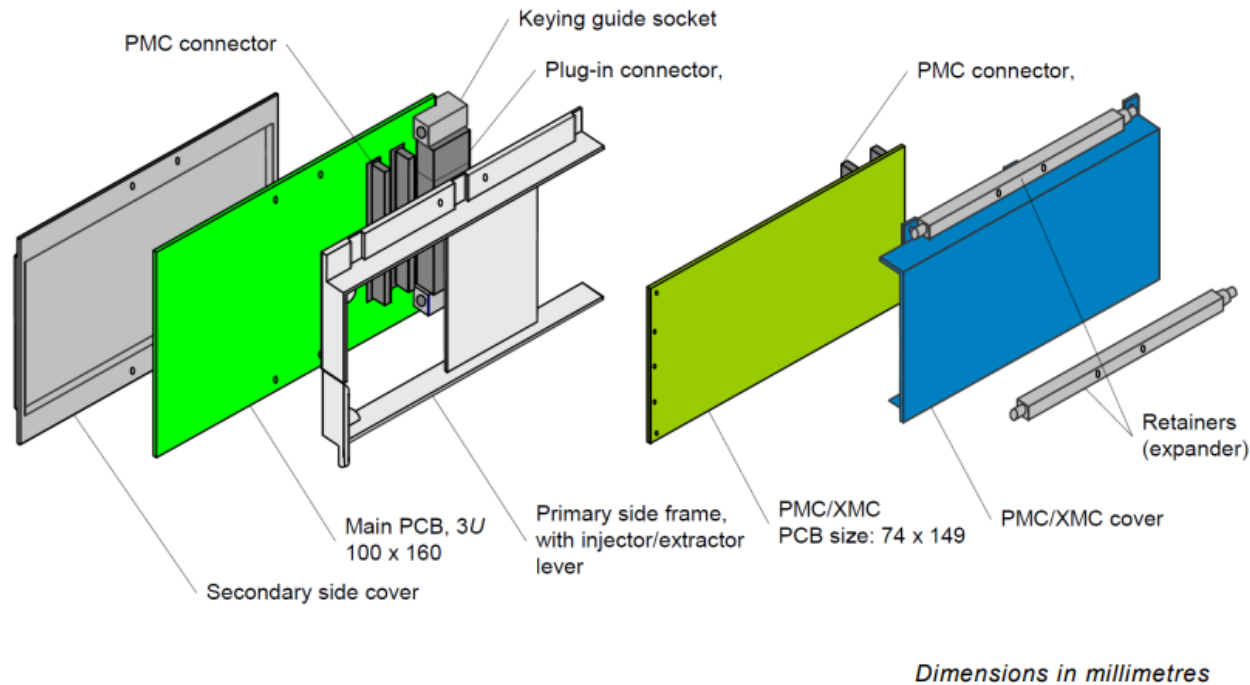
Assembly of VPX-REDI 3U conduction cooled plug-in unit
